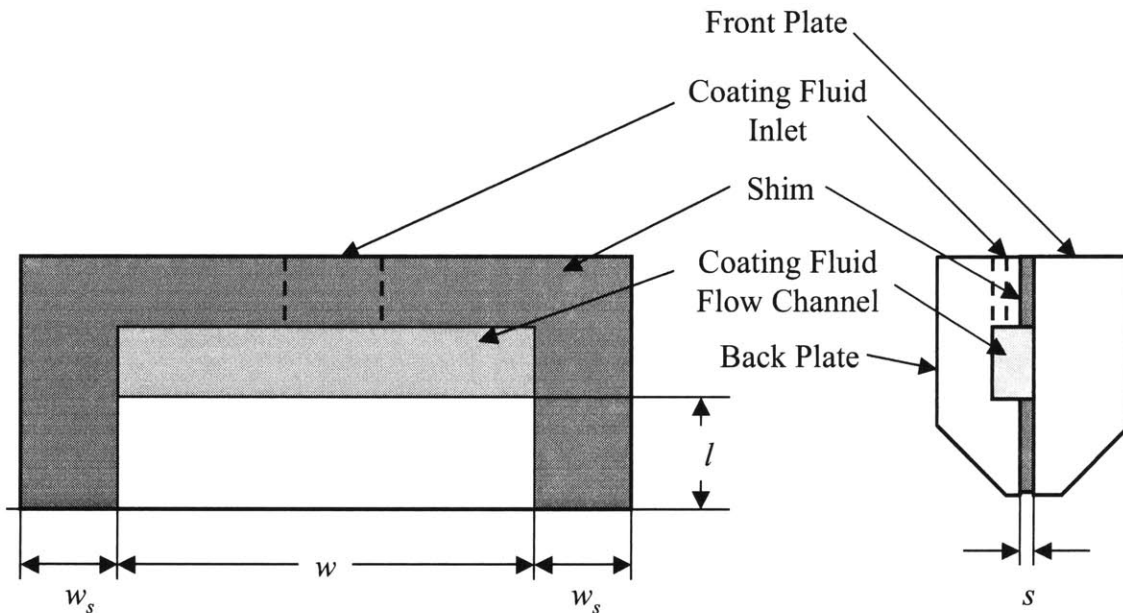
illustrates a design of a typical extrusion head (also known as a T-die). Coating fluid from the reservoir enters the extrusion head through an inlet path. This path directs the coating fluid to the flow channel, which is created by a shim inserted between two flat plates. The gap of the flow channel is equal to the size of the inserted shim,  $s$ . The coating fluid exits the extrusion head through the gap to be deposited onto the target substrate. If the length of the gap from the channel to the slot exit is constant, the only way a uniform flow can occur across the width of the coating head is for the pressure to be constant throughout the length of the channel. However, a pressure drop is created when photoresist flows in the channel. The pressure in the channel is highest where the resist enters the channel, at the center. Because the pressure is highest there, the flow rate through the slot will be greater at the center than at each edge. This creates a nonuniform coating profile that is higher in the center and lower at the edges. Figure 3-5 illustrates one of the head designs to convert such a nonuniform profile to a uniform one. The length of the flow path along the flat, from the channel to the exit, decreases at the edges ( $l_{edge}$ ) relative to the center ( $l_{center}$ ), so that the pressure drop per unit length along the width of the flat is constant,
